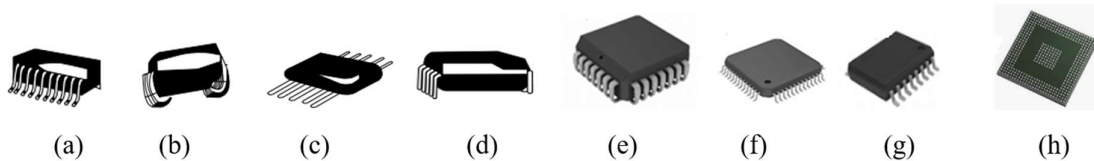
Types of legs and Packages for SMT component (a) Gull wing (b) J leg (c) Flat leg (d) I leg (e) PLCC (f) QFP (g) SOIC (g) BGA
